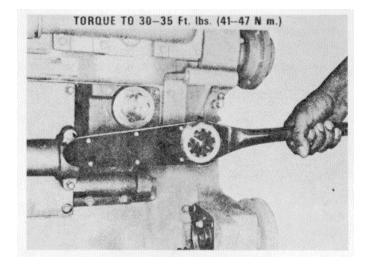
N-90. Tighten the Lubricating Oil Cooler to the Cylinder Block
